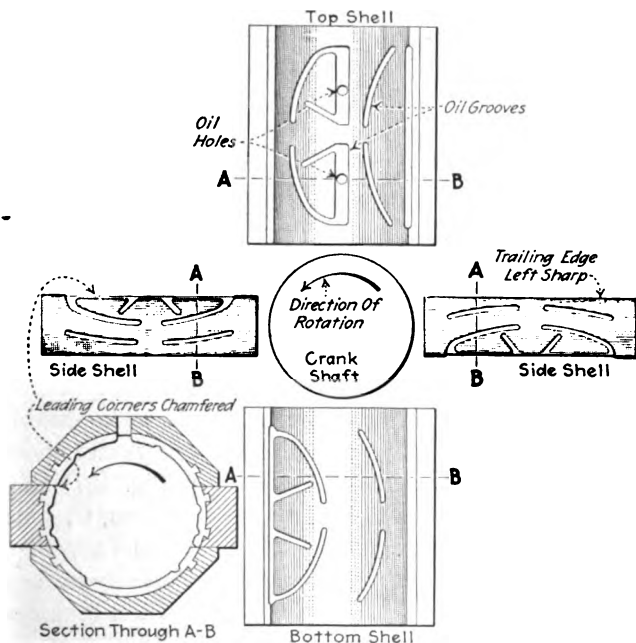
Correct oil grooves for main bearing. Note that the grooves are cut for a given direction of rotation. They first distribute the oil and then re-collect it to prevent it from running from the ends of the bearing. Only the leading edges of the bearing shells are chamfered.
